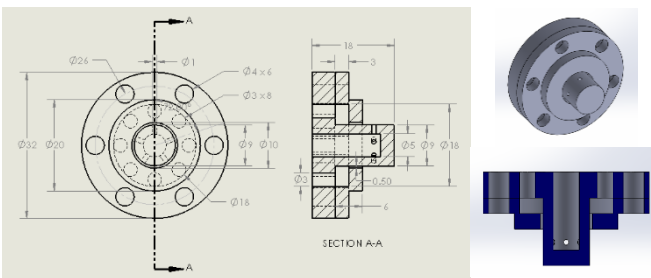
Engineering drawing and CAD model of pintle injector assembly
